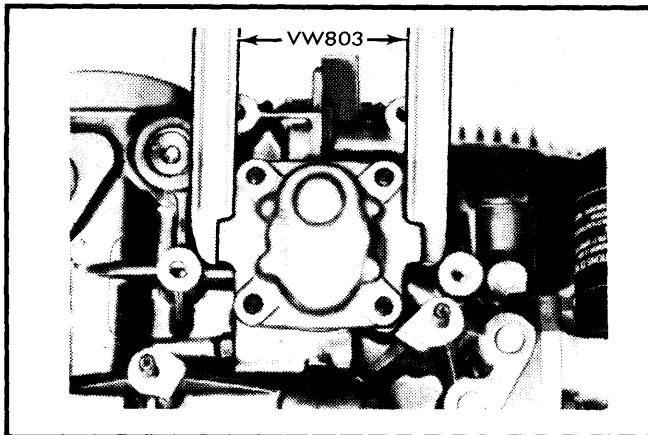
Using Special Tool (Puller) to Remove Oil Pump
